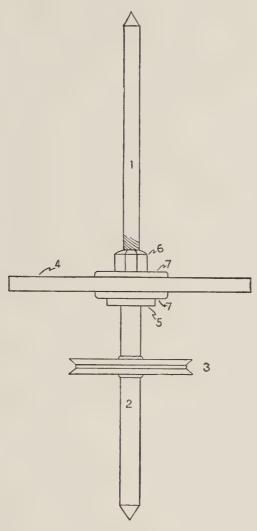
Professional Style Lap For Facet Cutting. 1, upper, narrower part of spindle; 2, lower, wider part of spindle; 3, grooved traction pulley; 4, lap; 5, collar rest; 6, nut; 7, flanges.
